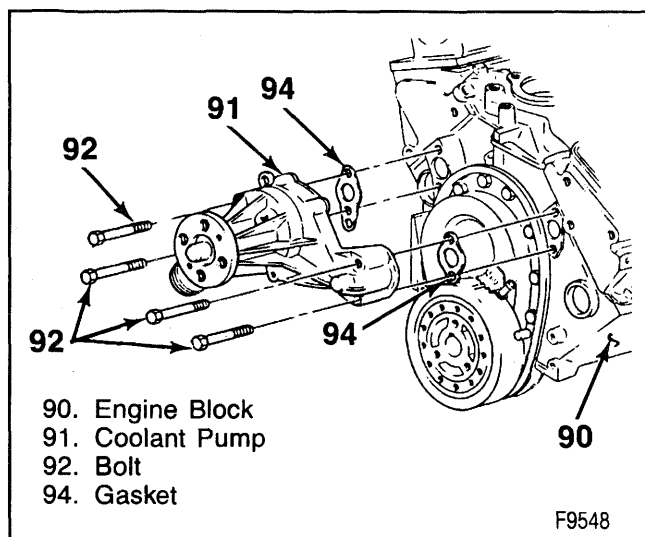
Coolant Pump and Components (5.0L and 5.7L Engines)
